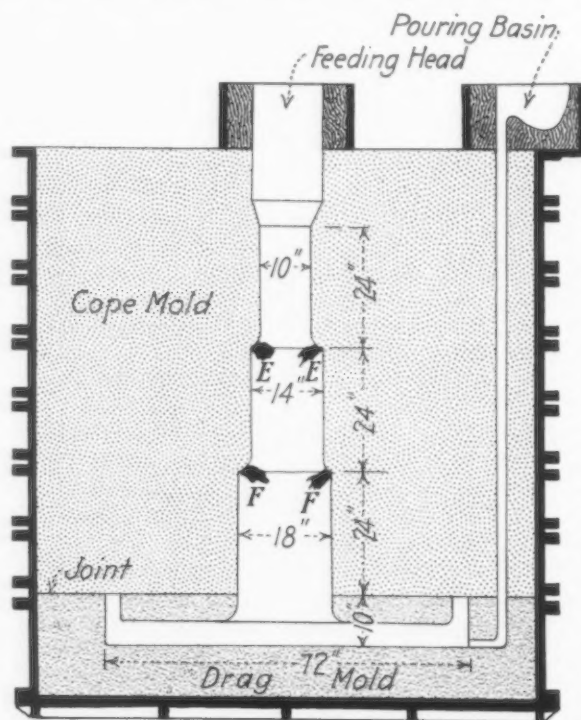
Method Previously Used in Molding Shaft and Face Plate. This gave an excellent face to the plate, but defects at EE and FF produced a condition damaging to the strength of the shaft
